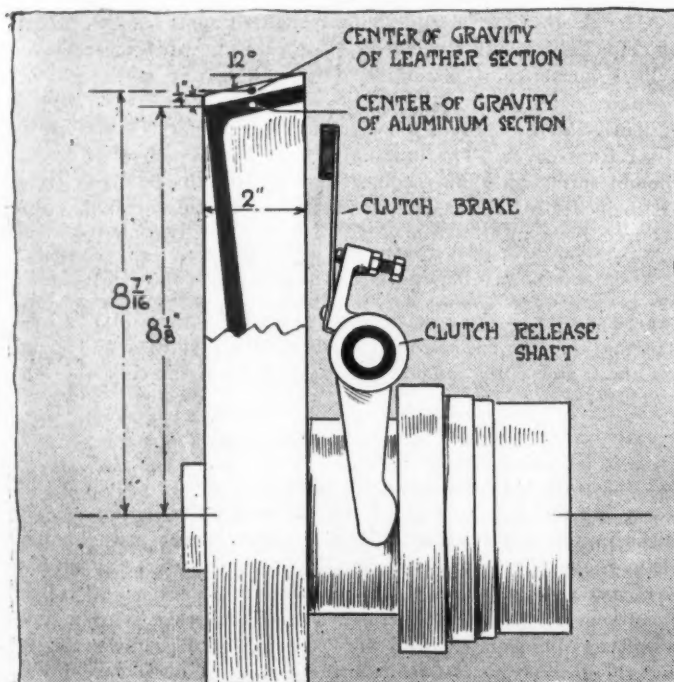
Dimensions of clutch showing also adjustable clutch brake fitted to release shaft
